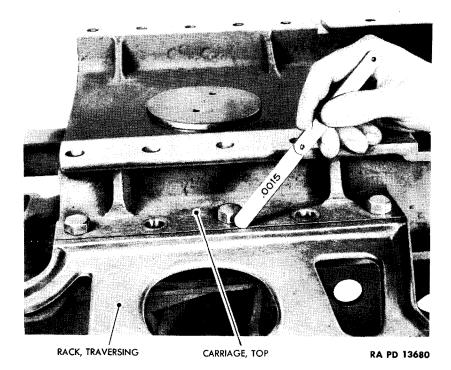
Gaging Fit of Traversing Rack to Top Carriage
